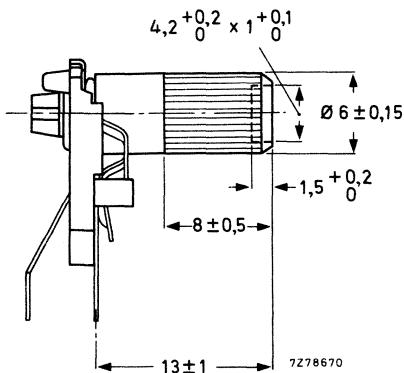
Test switch for vertical mounting with adjustment knob at the side of the selector contact.
